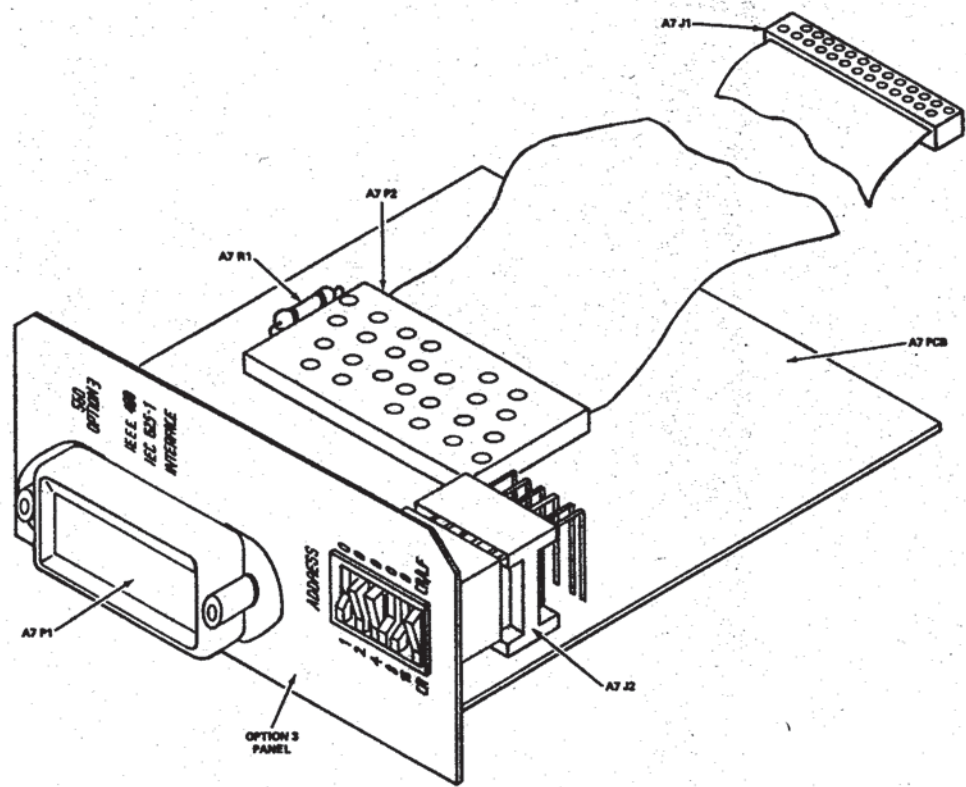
Option 3 Interface Panel and A7 PCB Assembly
